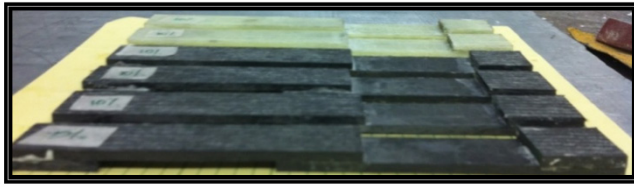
Typical single-lap joint specimens (dimensions in mm)
